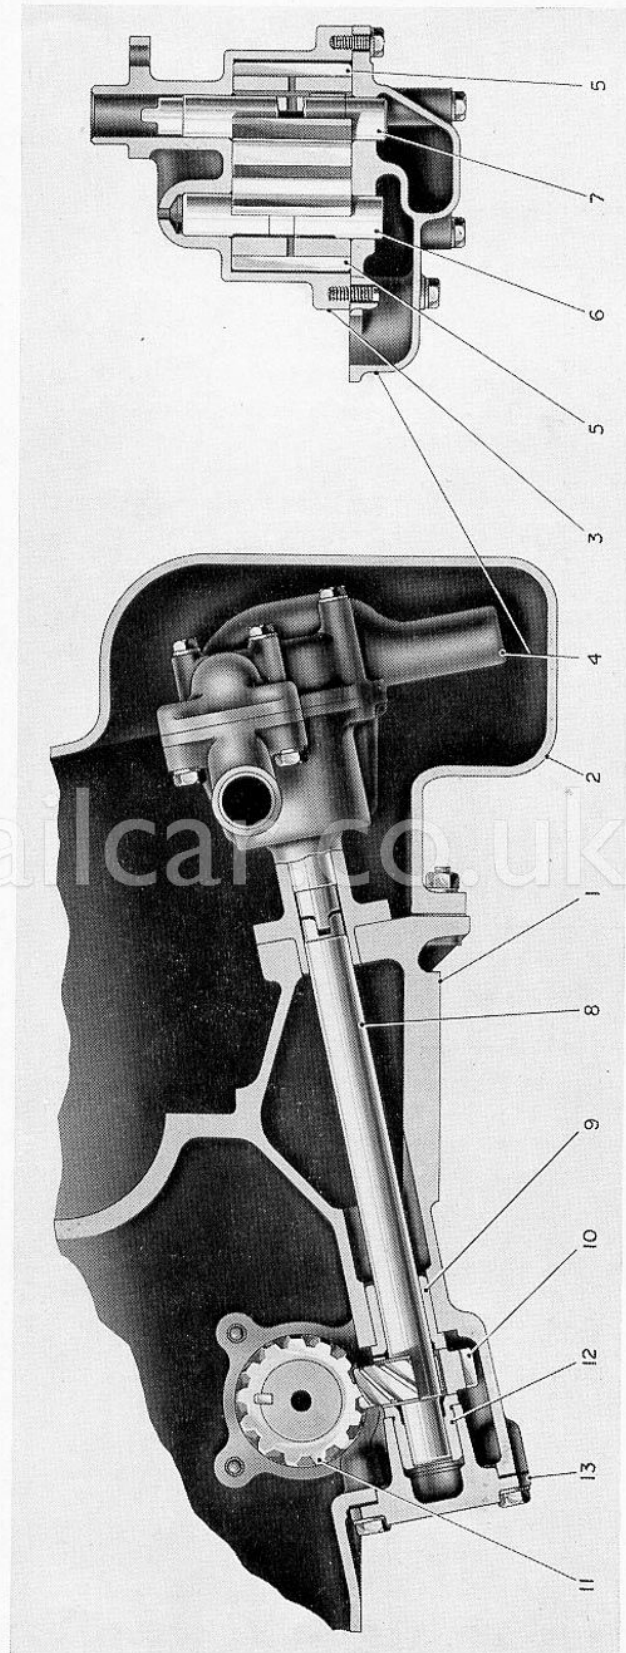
SCAVENGE OIL PUMP AND DRIVE
